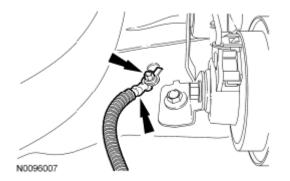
Locating Electronic Power Assist Steering (EPAS) System Wiring Harness Ground <u>Mounting Bolt</u> Courtesy of FORD MOTOR CO.
